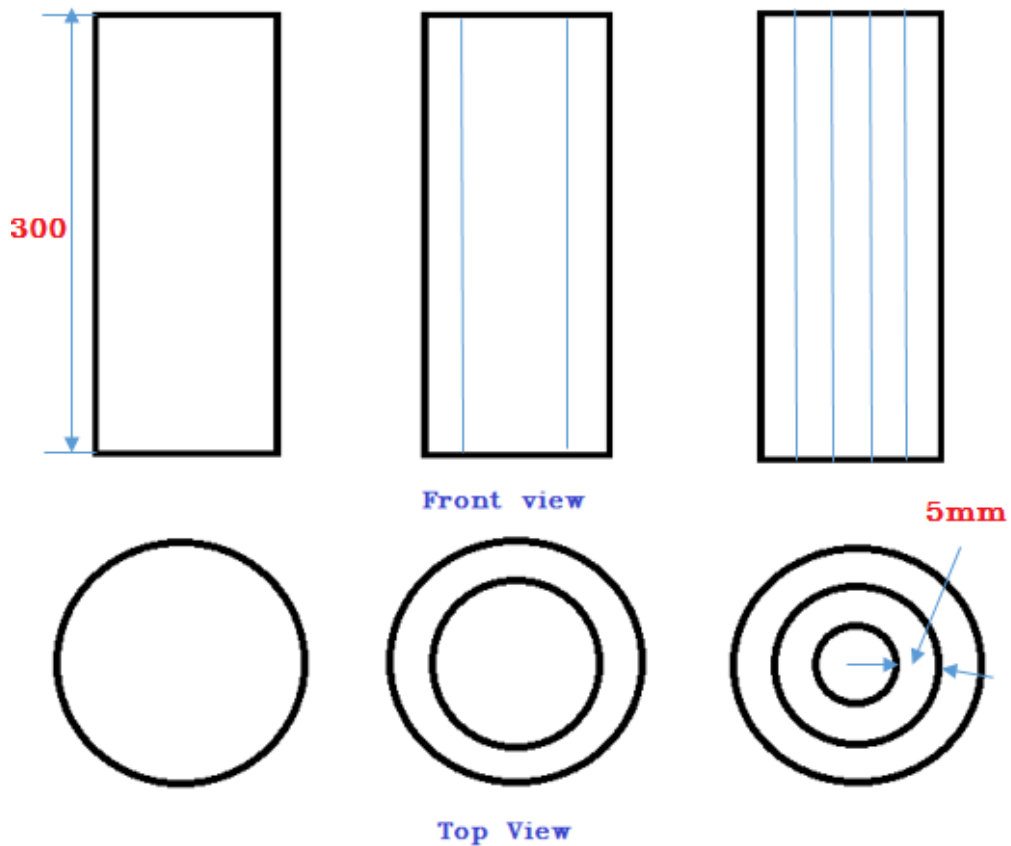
Front view and Top view of the single tube, two-tube and three-tube circular with the length and clearance .
